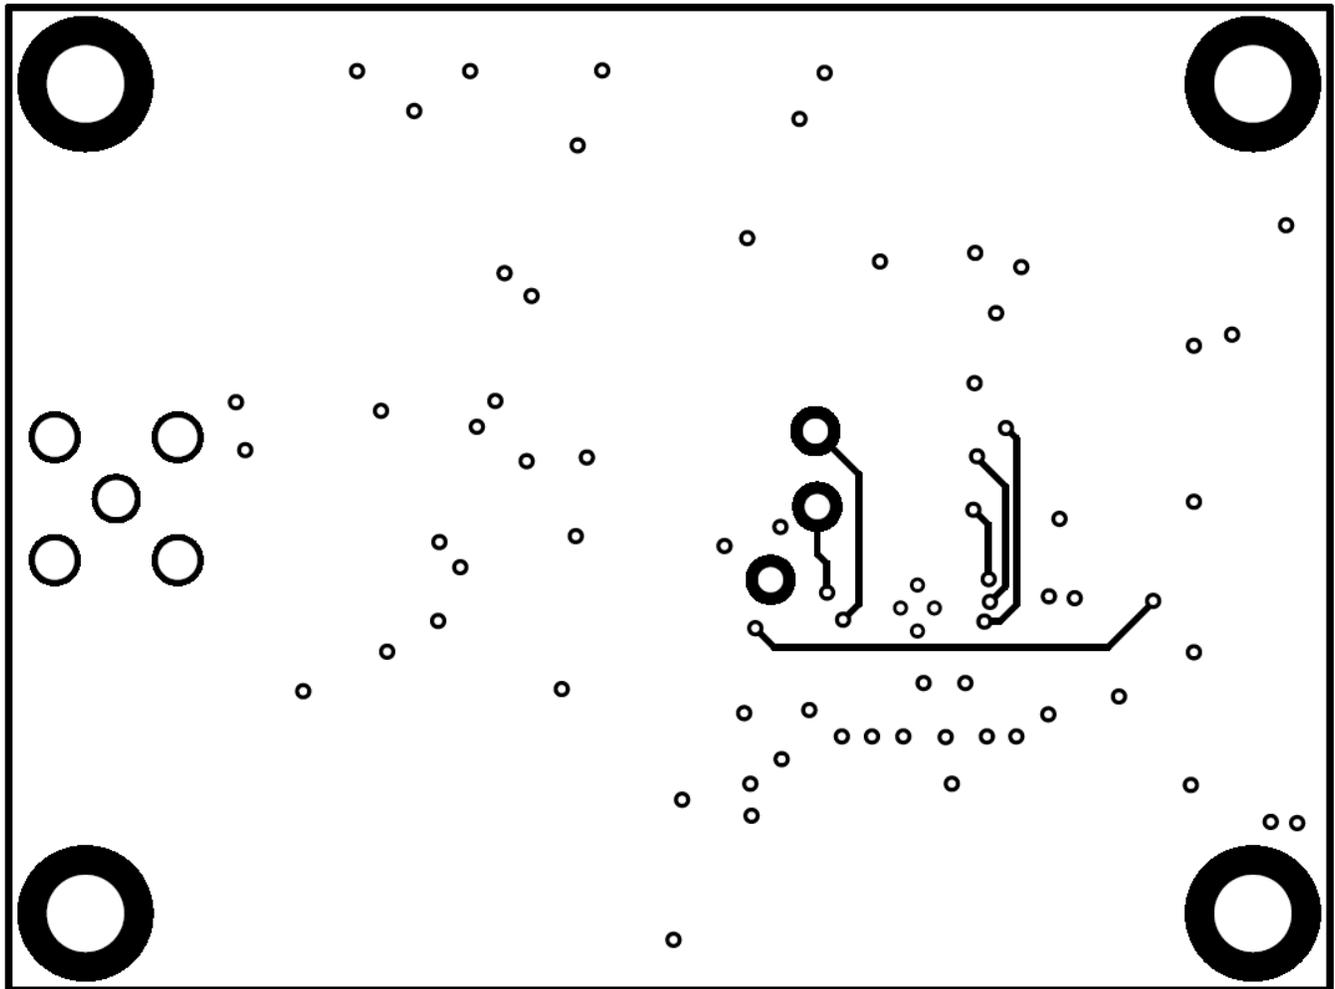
ADS7049-Q1EVM PCB Layer 4: Bottom Layer
